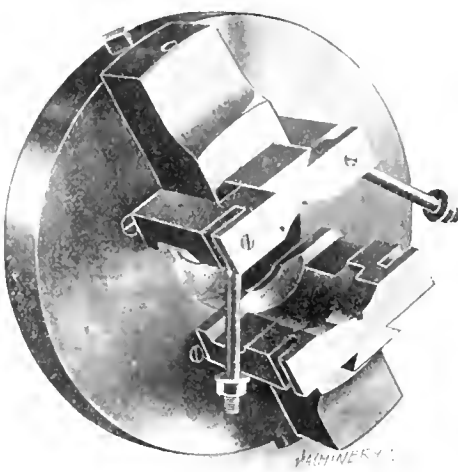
Special Chuck, provided with Jaws for Holding Gas Engine Cylinders.
